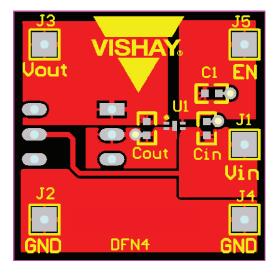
Top, TDFN4 1.2 mm x 1.6 mm PCB Layout
